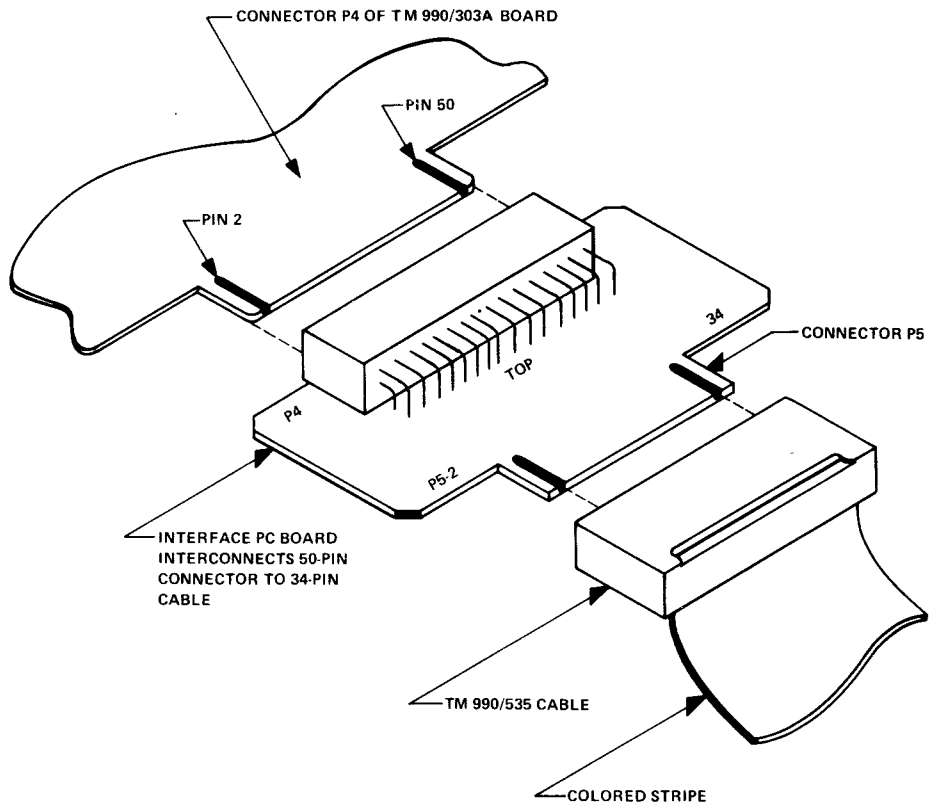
CONNECTING TM 990/535 DISK DRIVE CABLE TO P4 OF TM 990/303A BOARD
